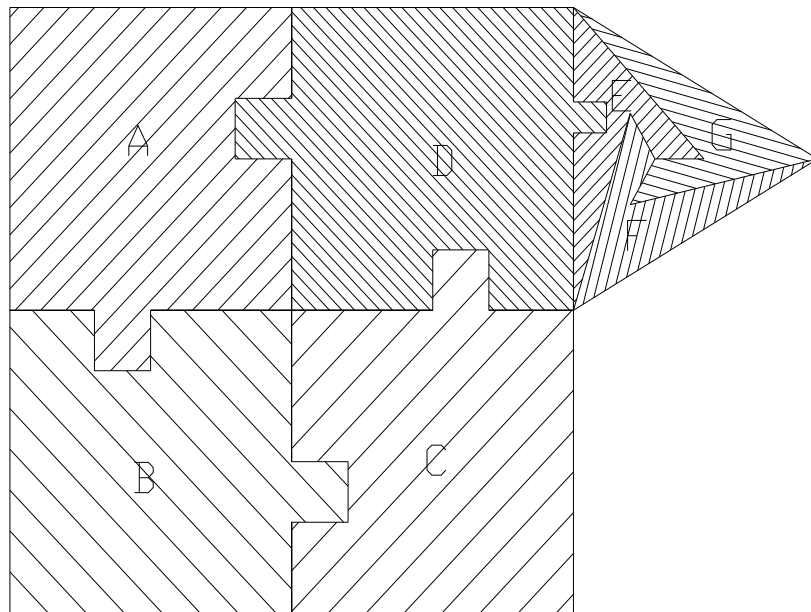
A product that can be assembled with a C-NS-NL-M assembly
